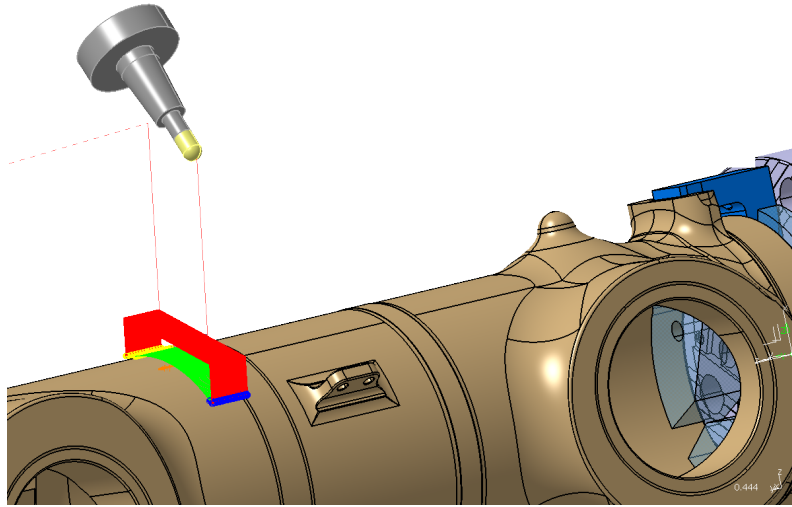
CAD model showing the industrial surface to center / quads machining tool path.
